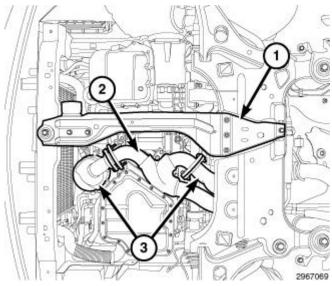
Aft Crossmember, Crossunder Pipe & Catalytic Converters Courtesy of CHRYSLER GROUP, LLC
